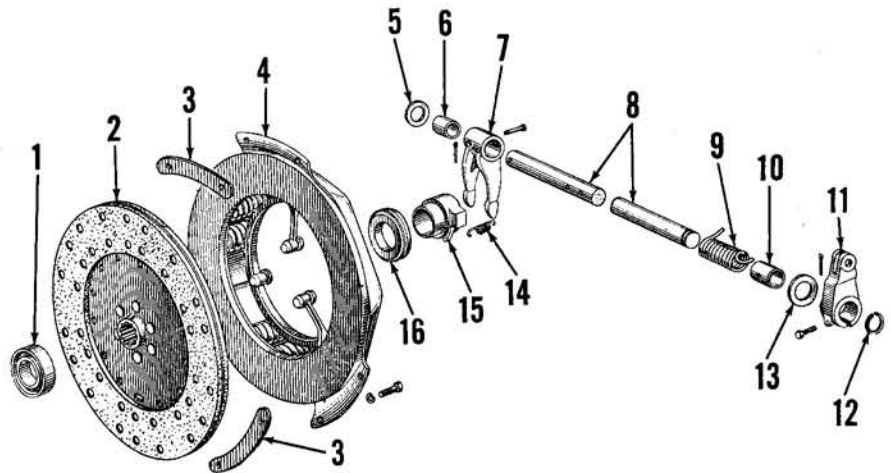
Exploded view of 11-inch diameter single clutch assembly. Spacers (3) are used between cover (4) and flywheel when heavy duty friction disc assembly is installed.
